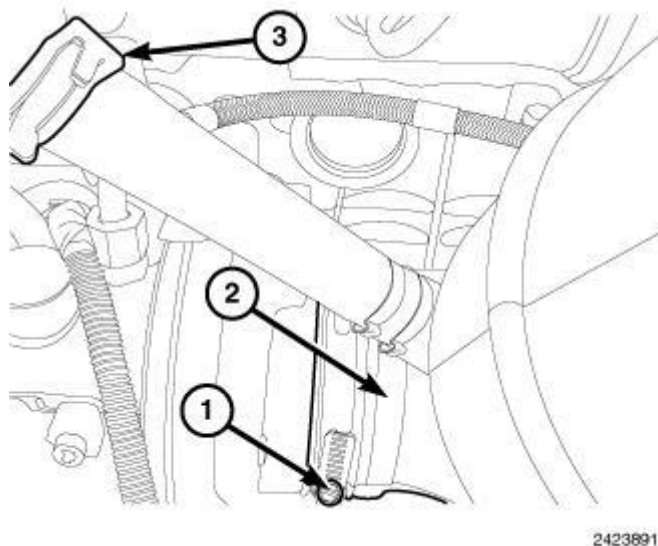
Identifying Clamp, Outlet Tube & Breather Hose
